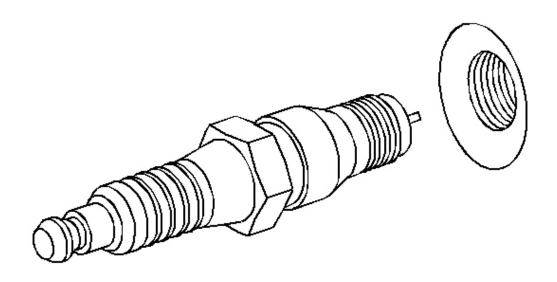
View Of Spark Plug And Sparkplug Seat Courtesy of GENERAL MOTORS CORP.
